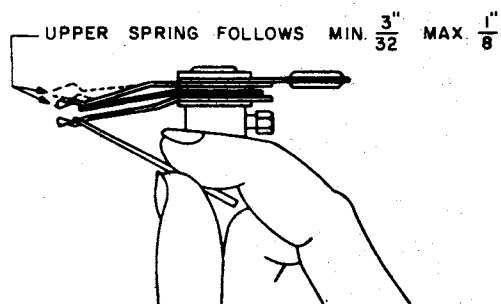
Spring Follow Measurements With Tension Removed From Lower Spring.
